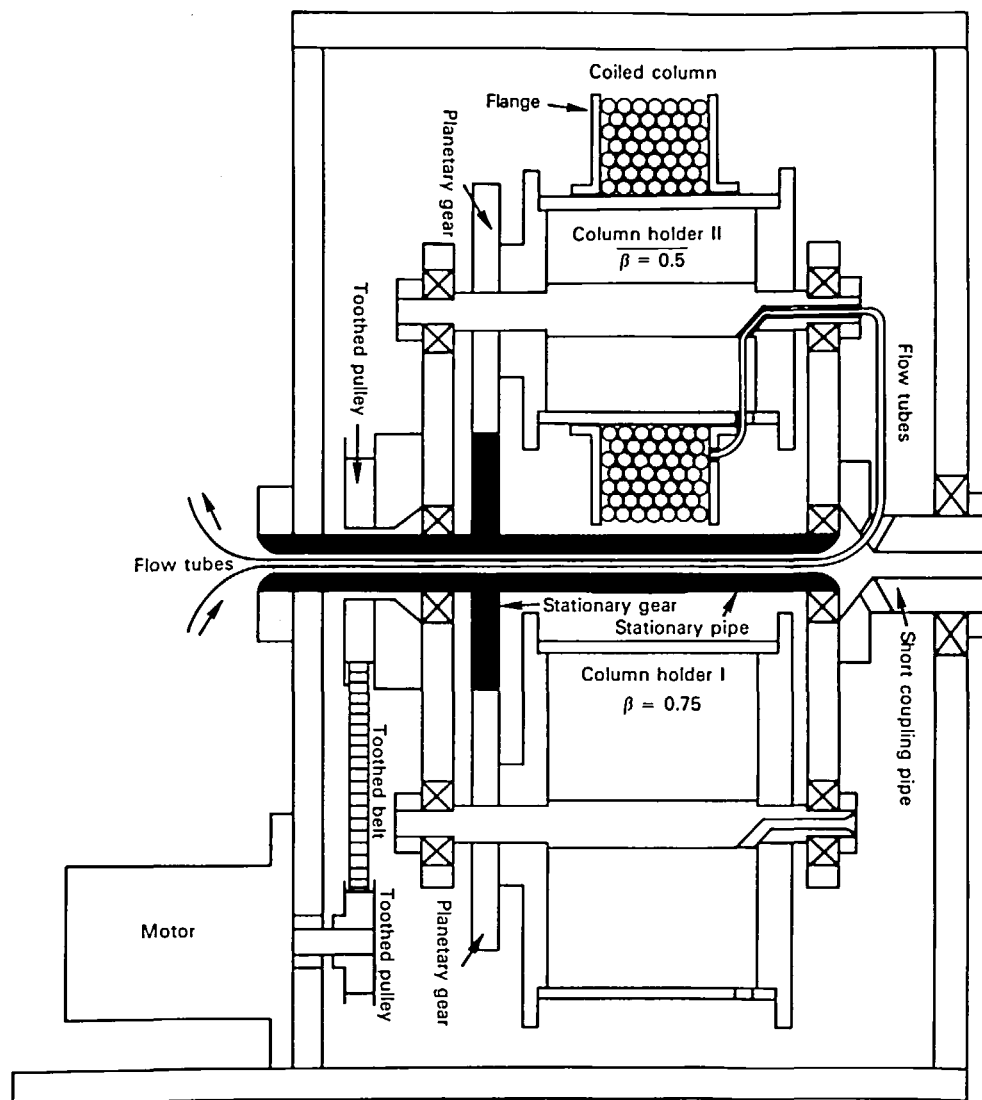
Cross-sectional view of a coil planet centrifuge with the original multilayer coil.
